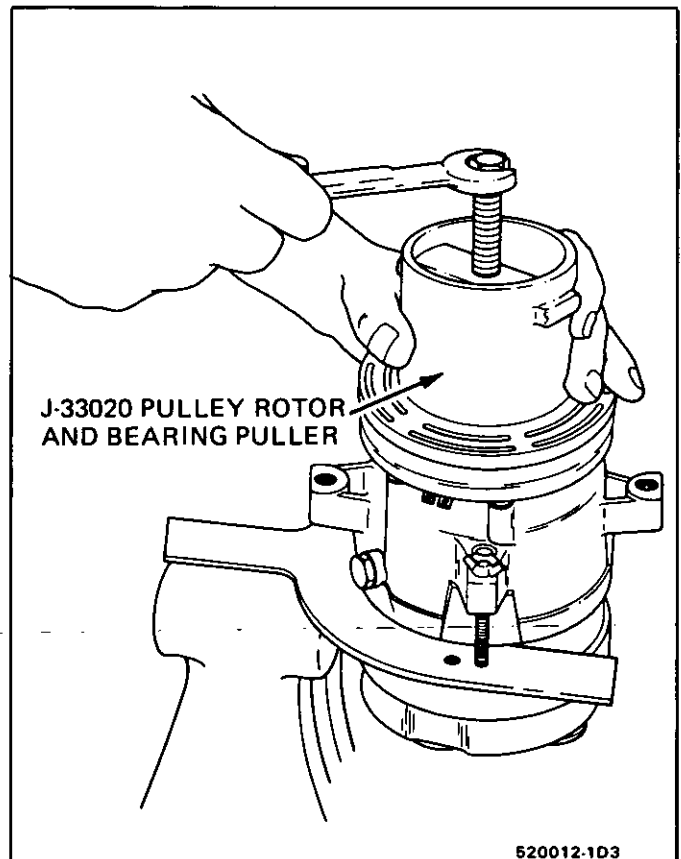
Removing Pulley Rotor and Bearing Assembly
